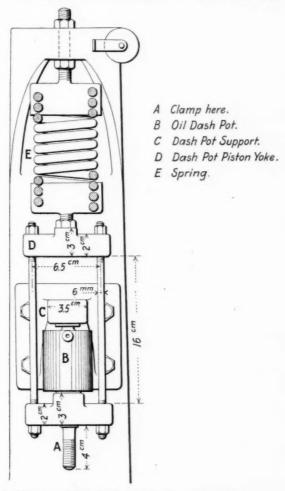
Head of Bureau of Standards Fabric Testing Machine.
